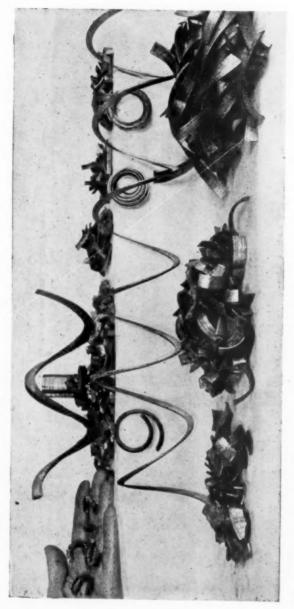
Samples of Chips: Those Held in the Hand Were Produced by Blunt Side Tool having 75 deg. Cutting Angle. ALL OTHER CHIPS WERE PRODUCED BY TOOLS HAVING CUTTING ANGLE OF 45 DEG. OR LESS.
